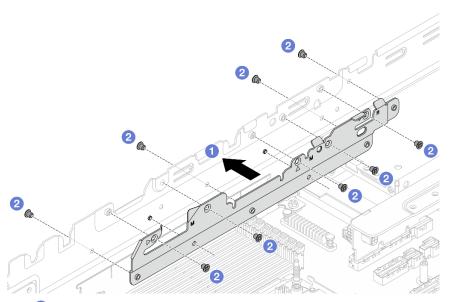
Installing rearwall brackets for the 4 x 3.5" rear drive cage assembly
